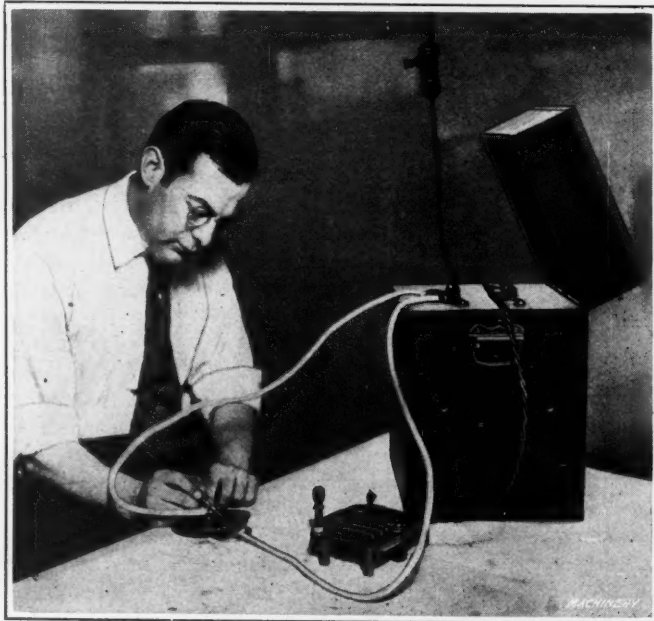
Brewster "Etchograph" engaged in marking Tools
